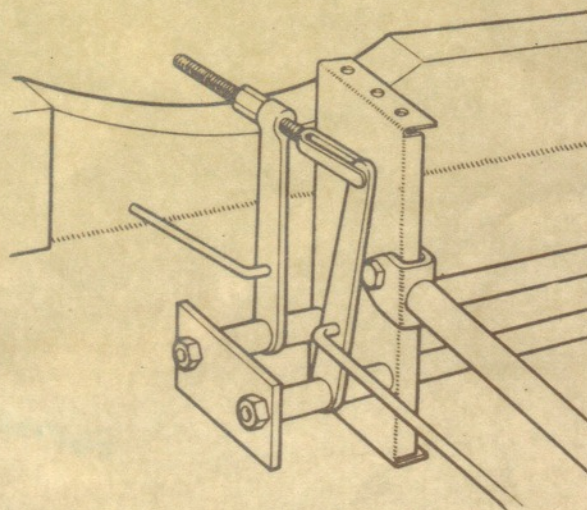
HANDBRAKE ADJUSTMENT MECHANISM
